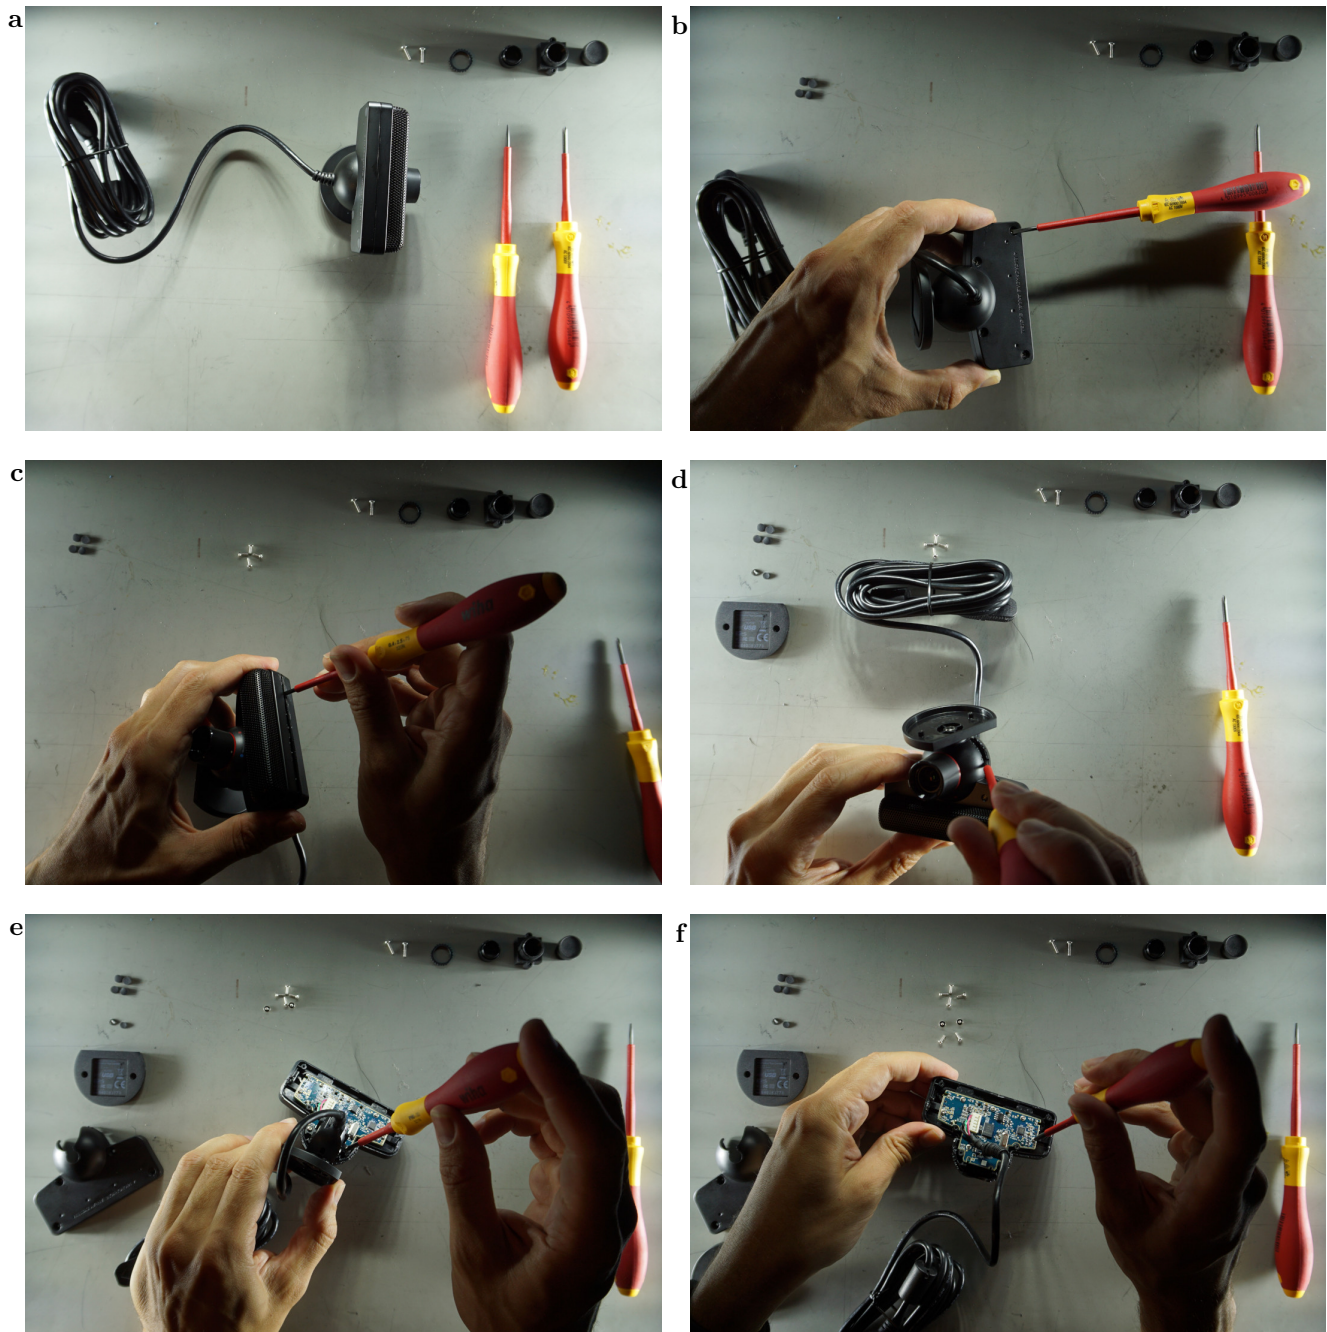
Disassembling the camera: a: Tools and parts required for modification. b: Unscrew the back of the camera. c, d: Carefully break notches holding back and front together. e, f: Unscrew cable holder and PCB.
